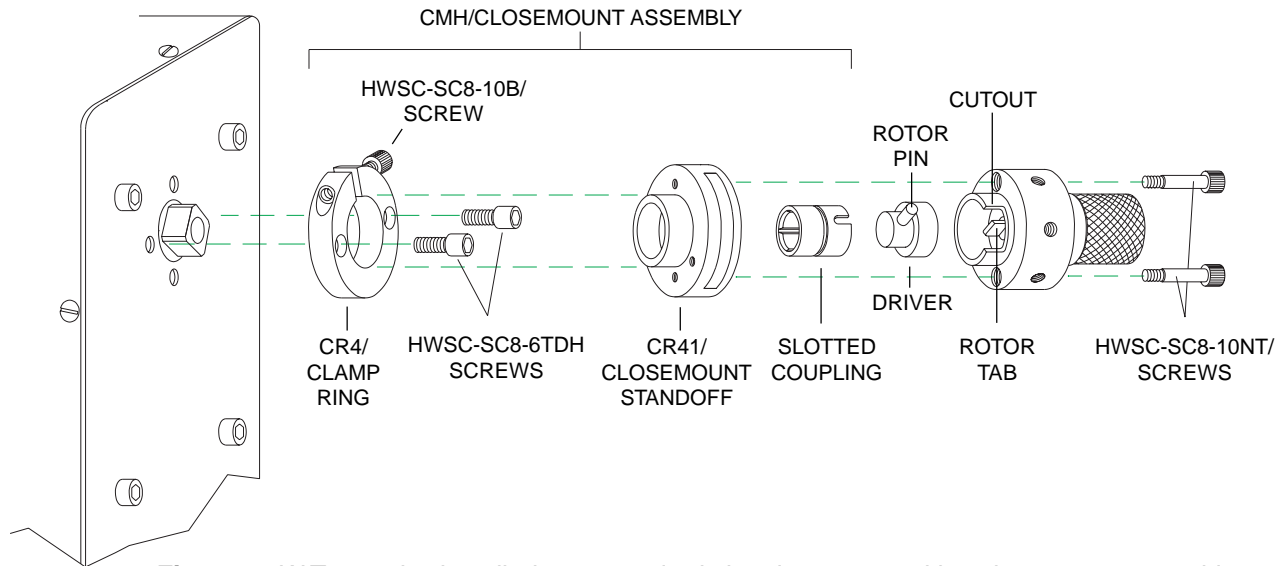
W Type valve installed on a standard electric actuator with a closemount assembly
